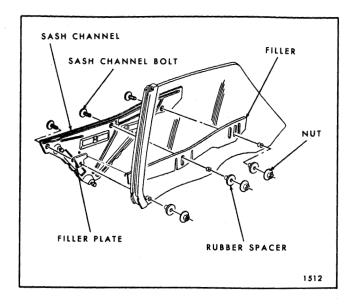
Rear Quarter Window Assembly - "B&C" -"37-57 and 67" Styles
